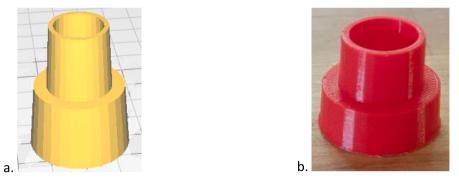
a) Rendering of the hose adaptor, b) 3-D printed hose adaptor.
